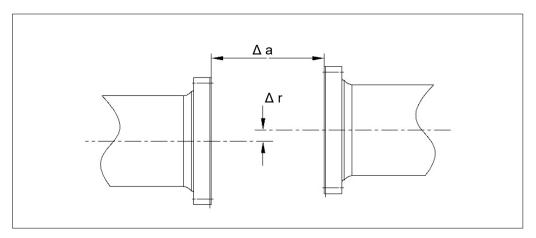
Checking radial offset and flange distance (with use in paper machines)
